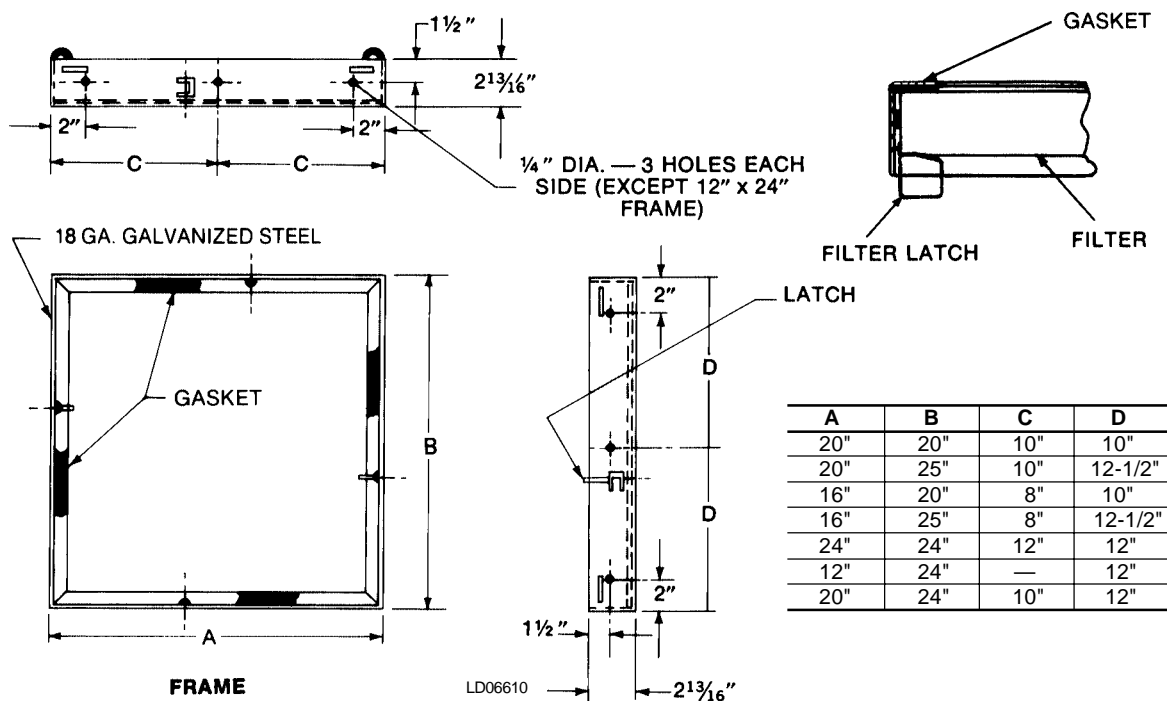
A – UNIVERSAL HOLDING FRAMES & LATCHES SPECIFICATIONS
